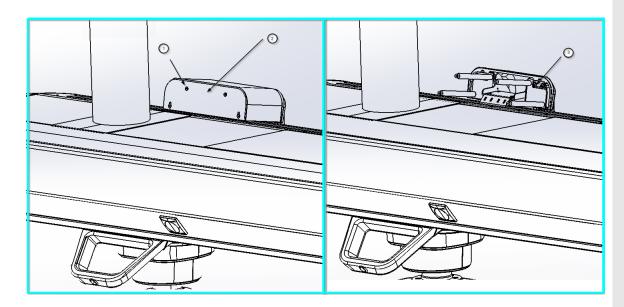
Disassembly/assembly of end caps on ABITUS main body
